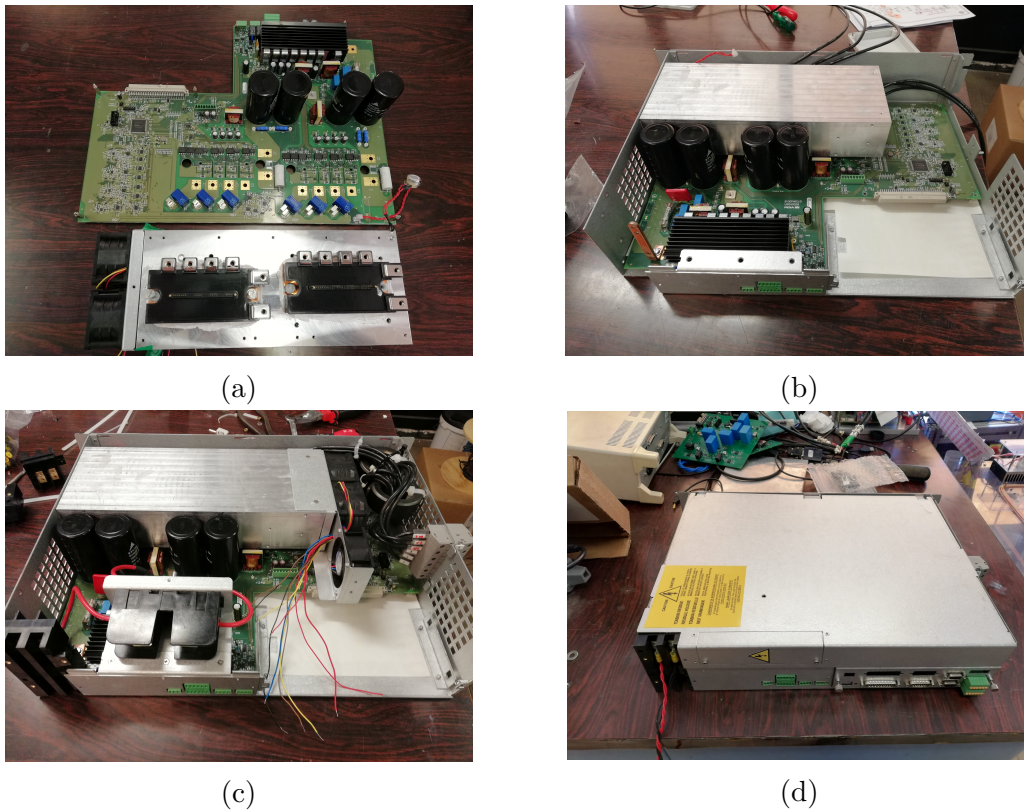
Mounting process of the power converter: (a) PCB, power modules and heat sink, (b) PCB, power modules and heat sink mounted inside the mechanical box, (c) PCB, power modules, heat sink, fans and common mode chokes mounted inside the mechanical box and (d) final version of the power converter.
